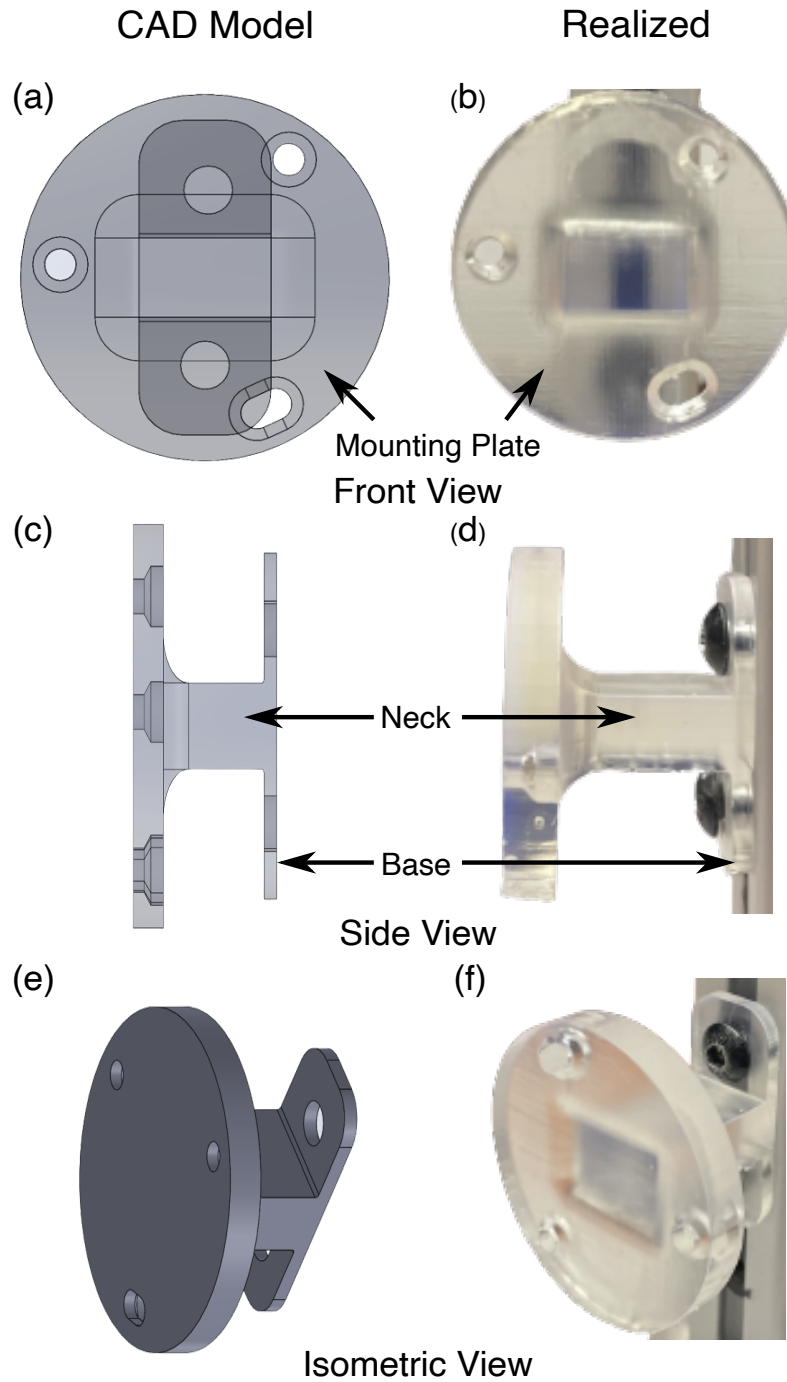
Vertical support's CAD model and manufactured component presented with a front view, (a) and (b), side view, (c) and (d), and isometric view, (e) and (f).
